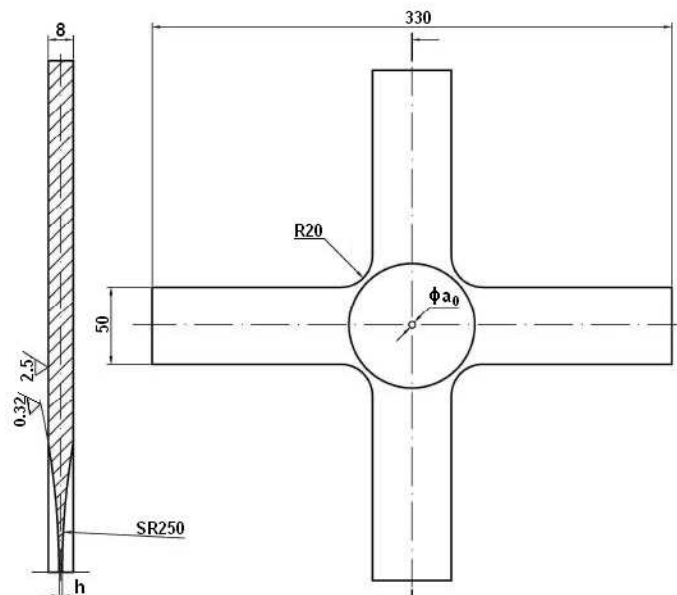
Specimen for tests of fatigue crack growth, dimensions in mm
